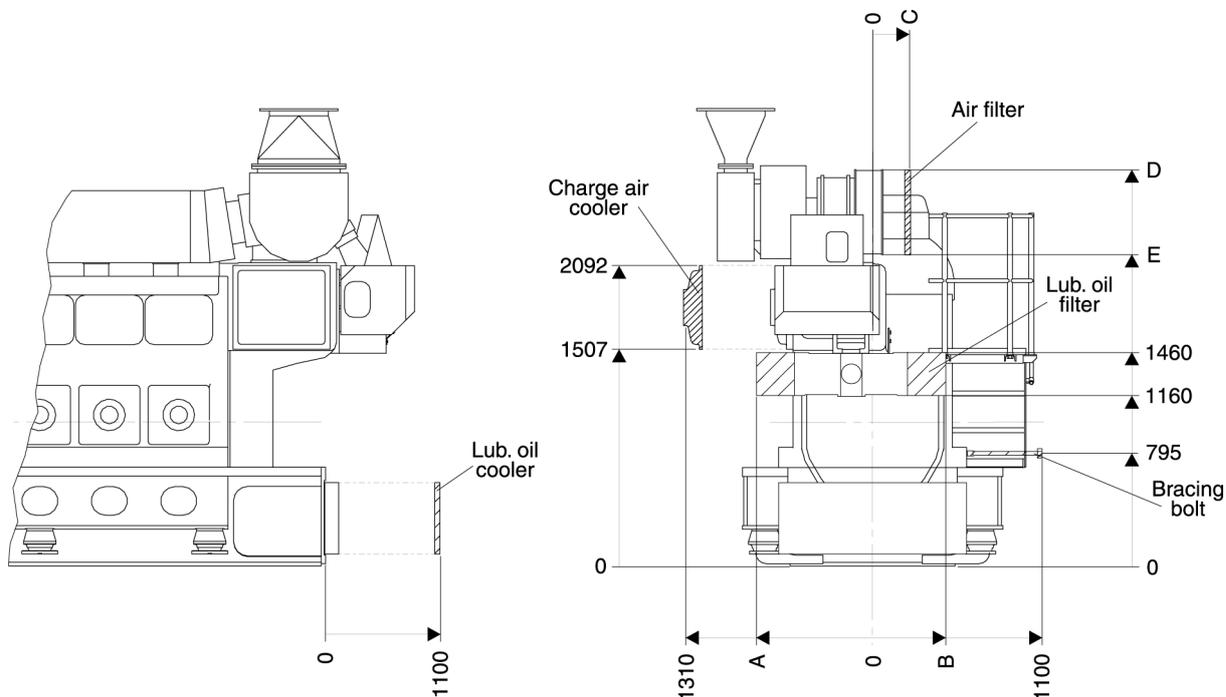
Overhaul areas for charge air cooler element, turbocharger filter element, lub. oil cooler, lub. oil filter cartridge and bracing bolt.
